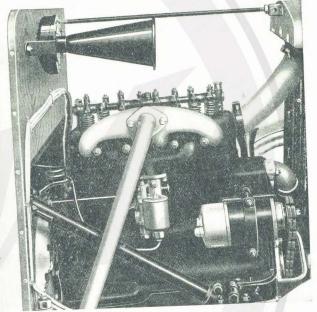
OFFSIDE OF THE IT H.P. "STANDARD" ENGINE. Showing the carburettor in the centre, exhaust branch and pipe and, near the right-hand bottom corner, the belt-driven dynamo of the electric equipment.
